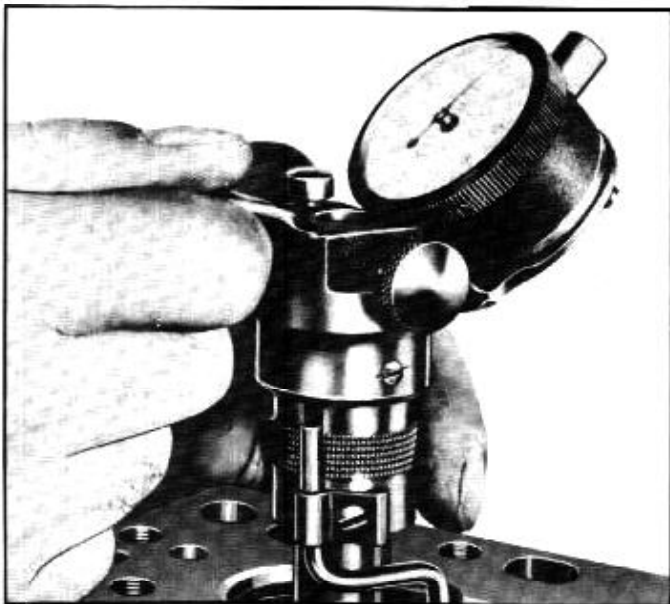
A-89—Checking Valve Seat Run-out—Typical
